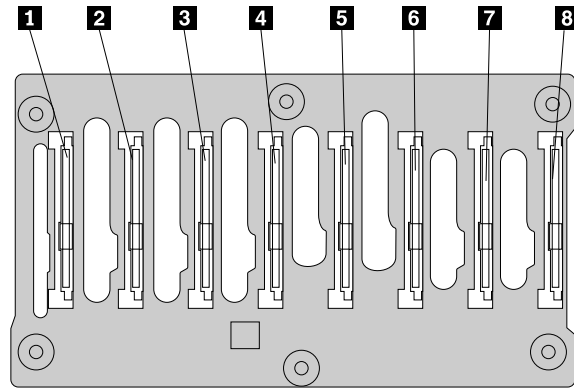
Front view of the 2.5-inch hot-swap hard disk drive backplane
